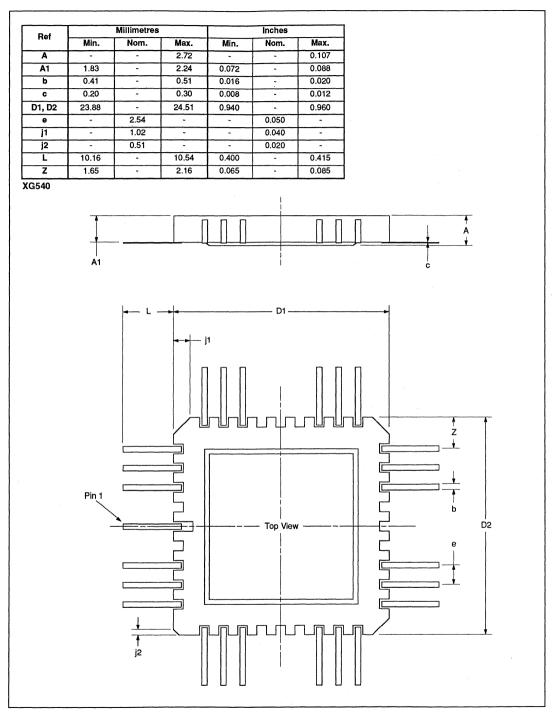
Dimensioned Drawing for the 68-pin Flatpack Package Topbraze
